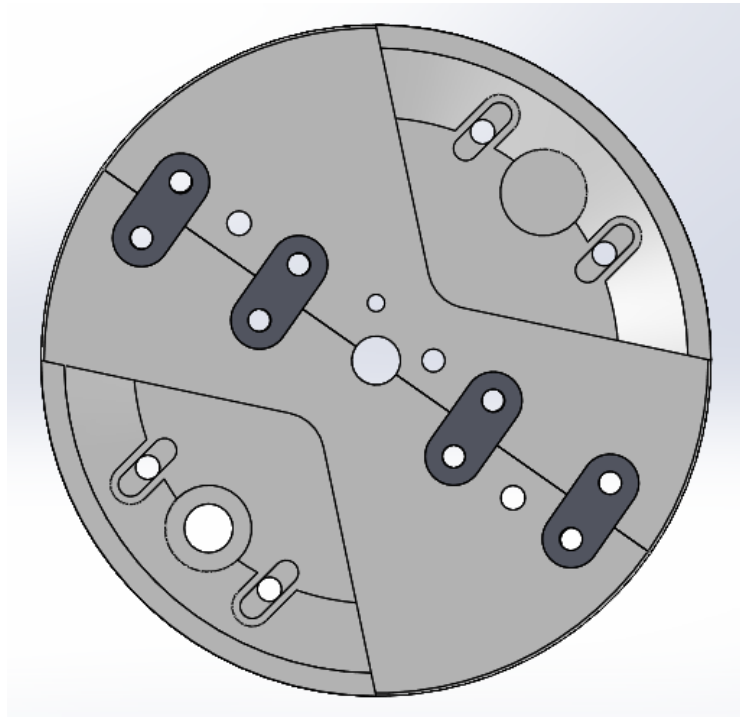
Two Parts of the Piston Assembled with Piston's Guides (Bottom View)
